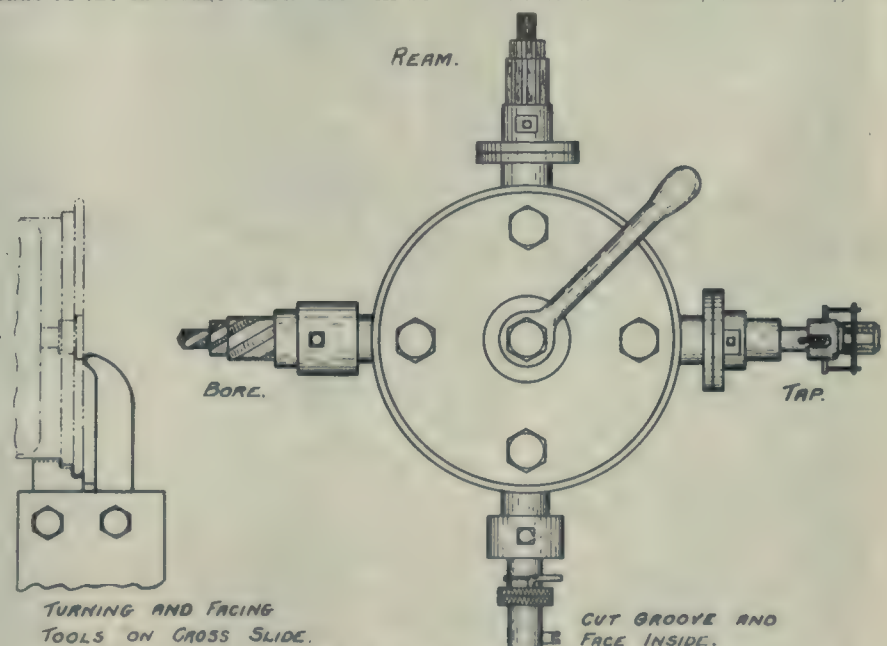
TOOLS ON SPECIAL "BULLARD" TURRET LATHE.
